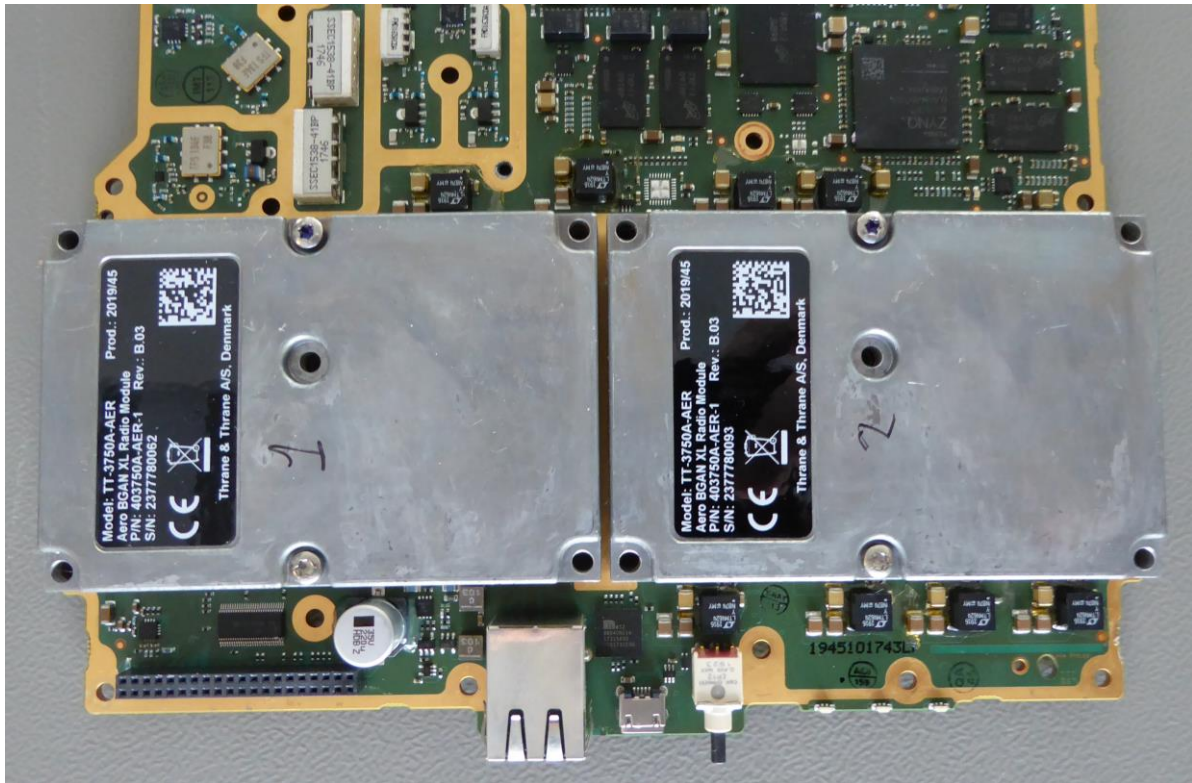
CSDU-5045 – Processor Board – Radio Modules
